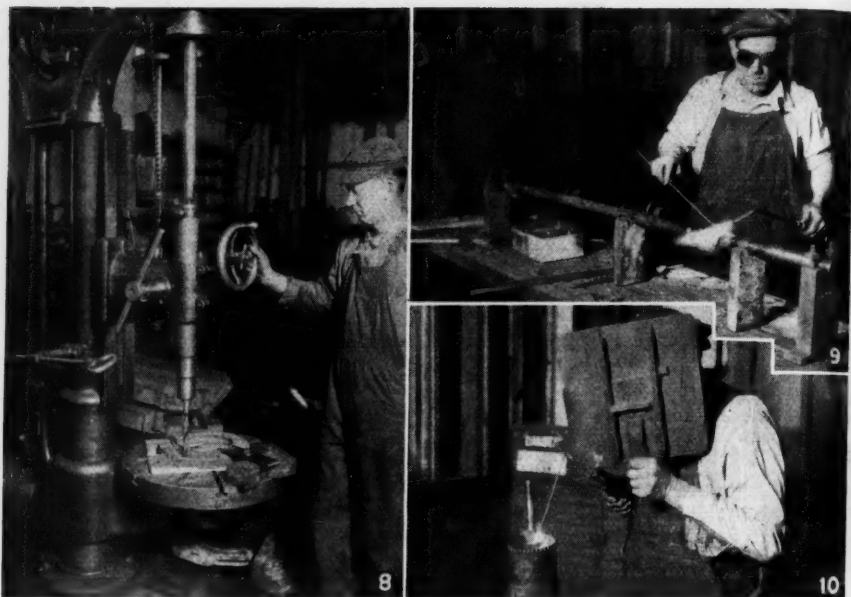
All the heavier drilling is done on this machine. Fig. 9—Welding a new section onto a broken crankshaft. Fig. 10—Using the arc welder to anchor a loose journal in place.
